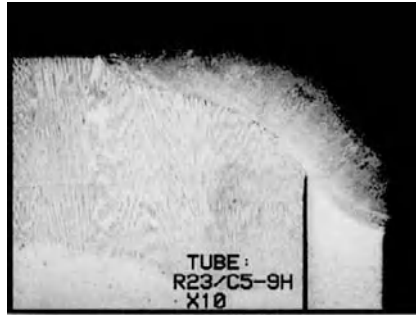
Macrographic section of a tube/tubesheet weld
